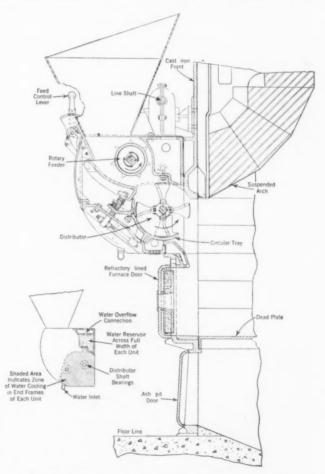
sectional elevation of spreader unit, showing rotary feeder and distributor
